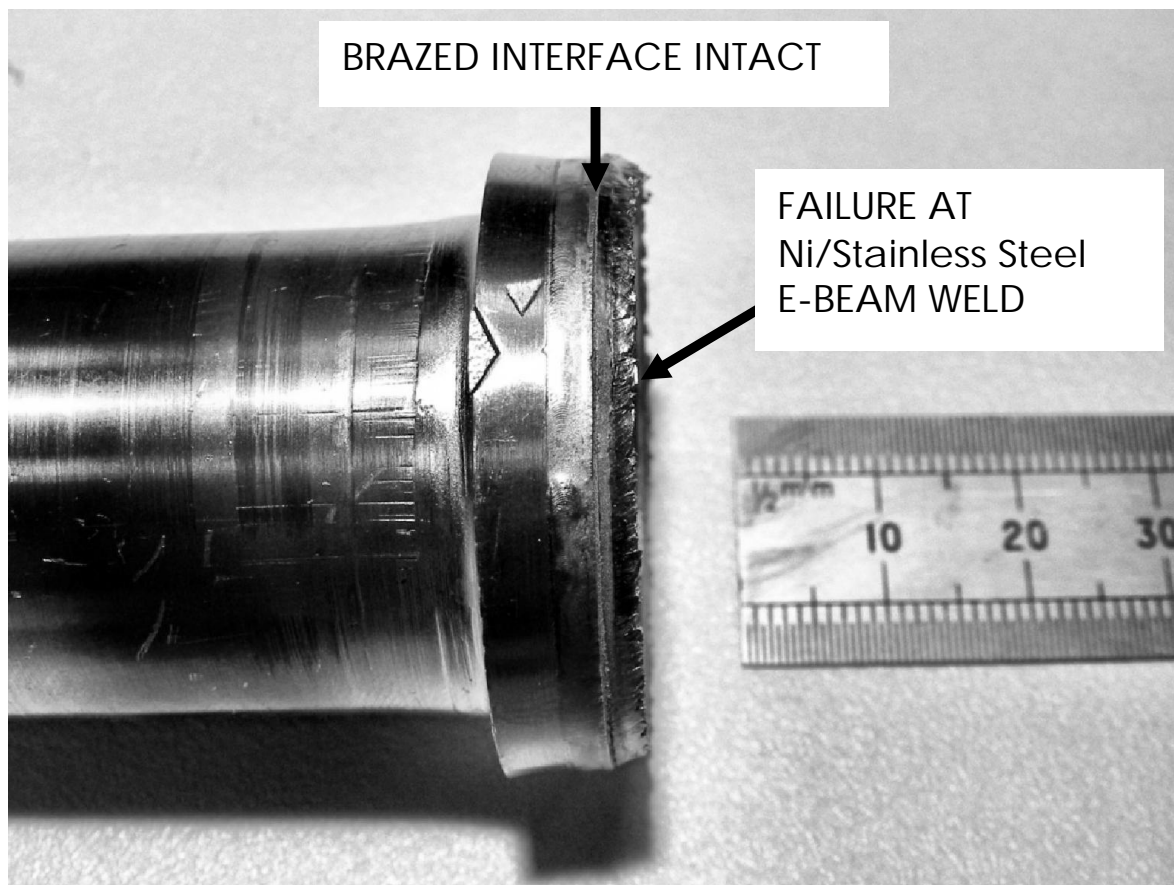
Simple butt joint following tensile testing – brazed interface remains intact, failure occurred in the Stainless Steel /Ni electron beam weld
